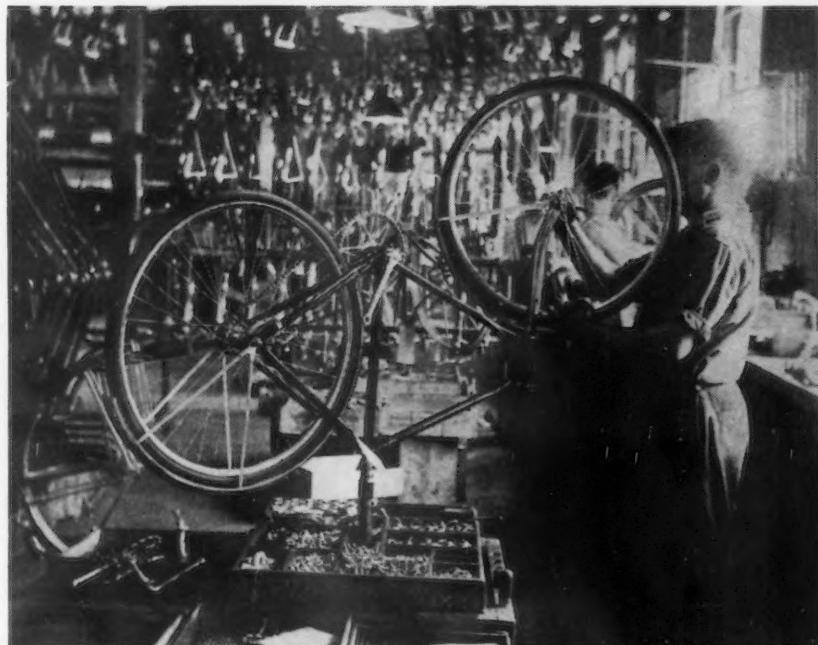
Setting up wheels and putting on tires are sub-assembly operations.
